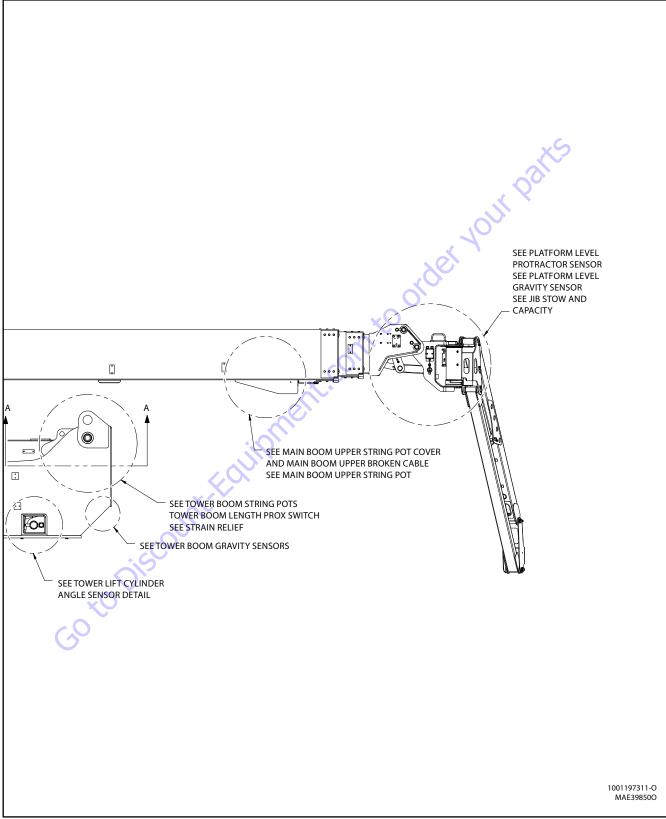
Boom Sensors Installation - Sheet 2 of 13
